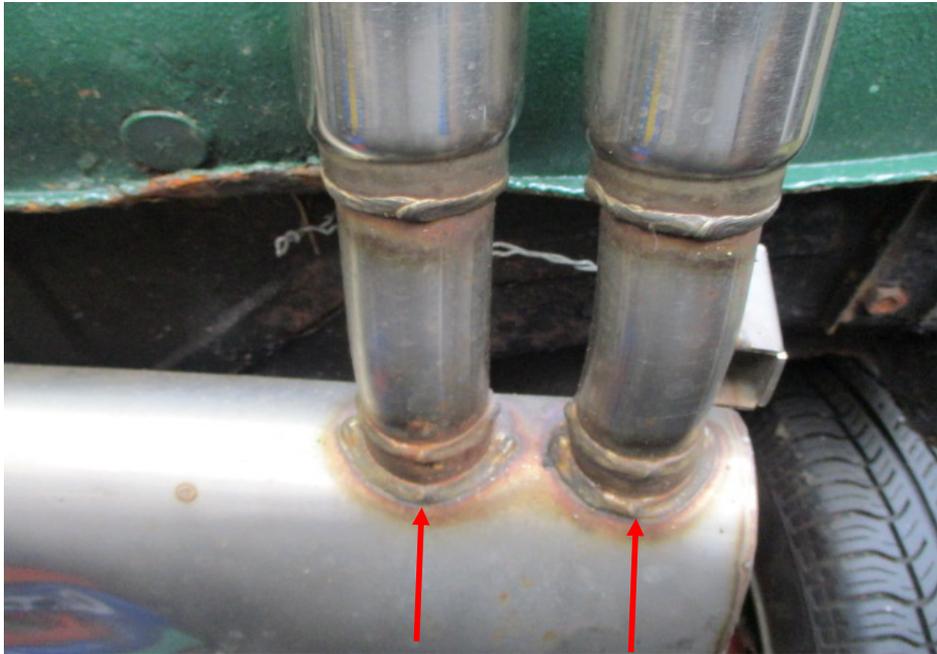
shows another view of the welding marks (arrowed) that were seen surrounding the area where the exhaust end pipes join the rear exhaust muffler.
